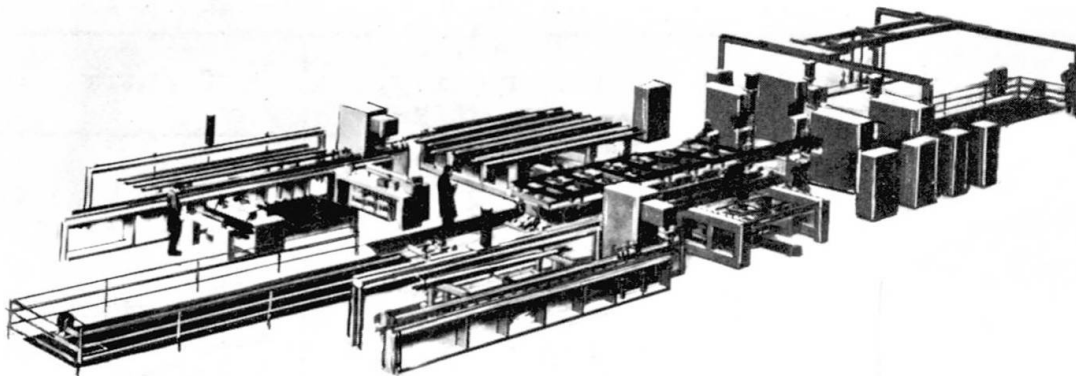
General view of monitor sashes assemblage-and-welding line.
